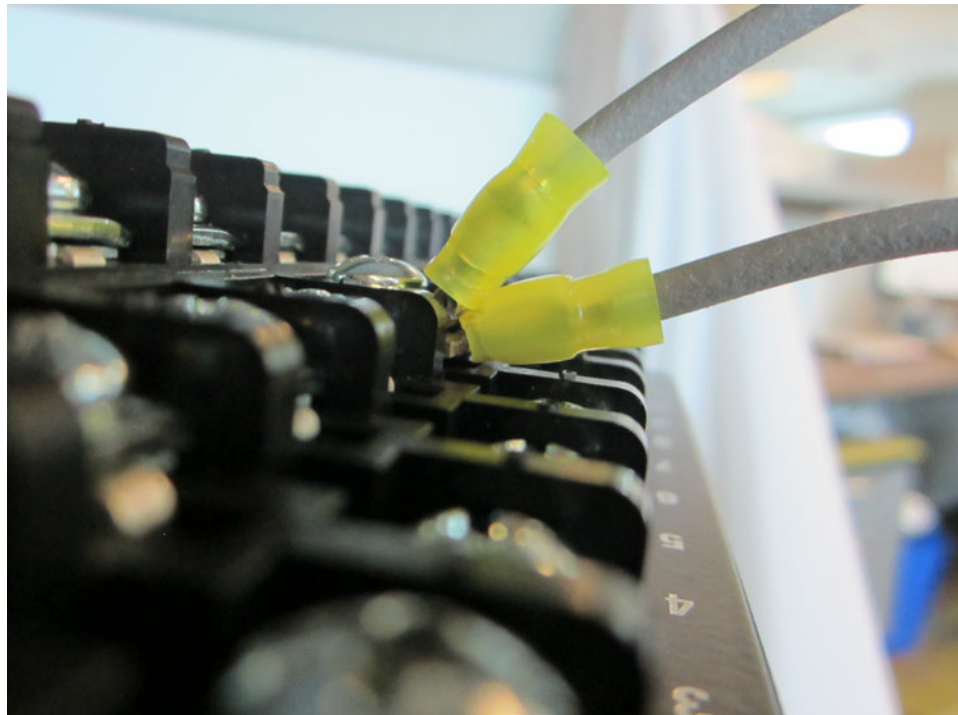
INCORRECT INSTALLATION METHOD (lower lug reversed)
